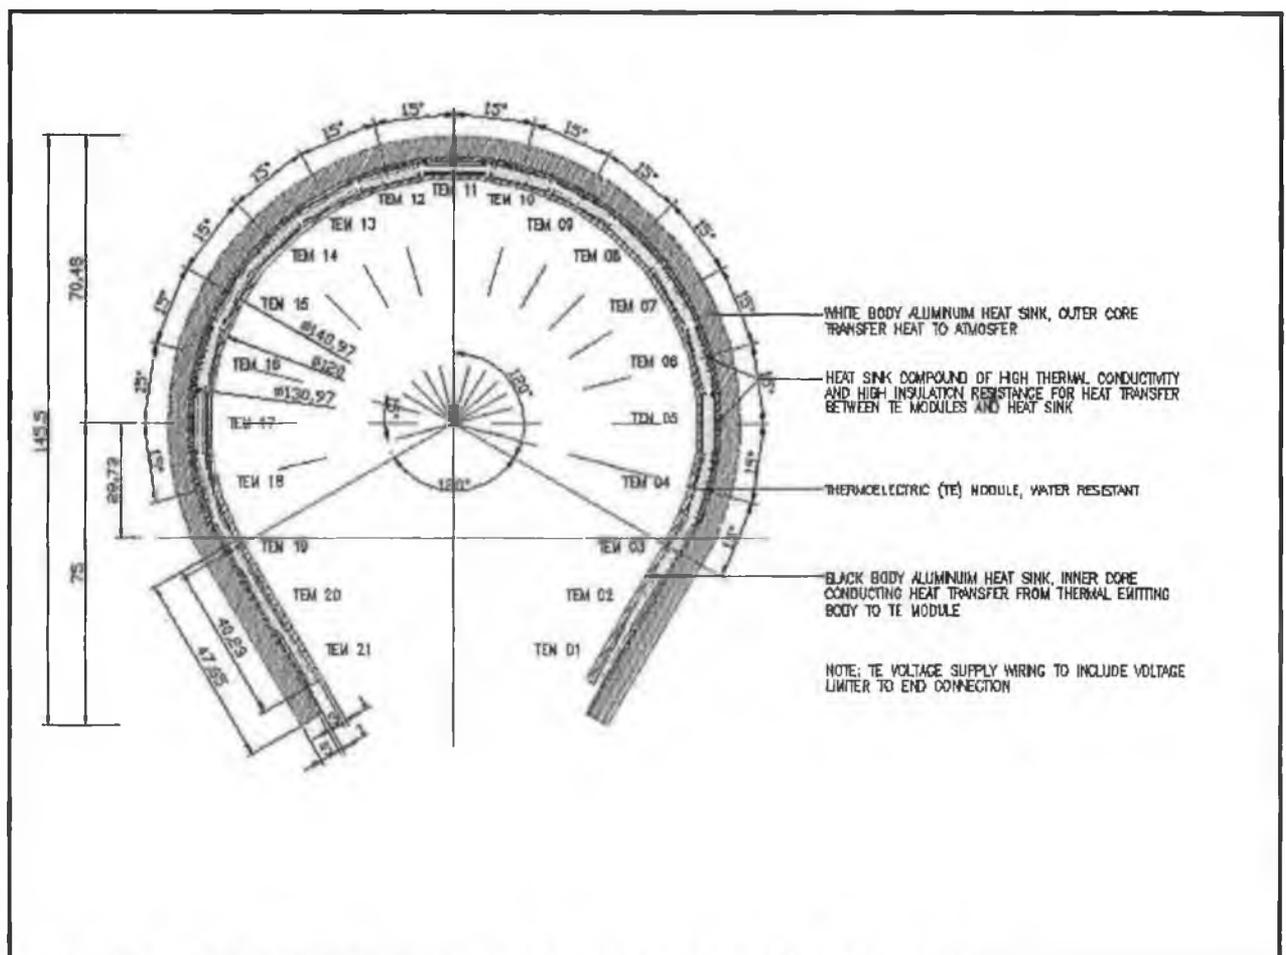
The proposed construction layout of the MPTG (TE Collar)
